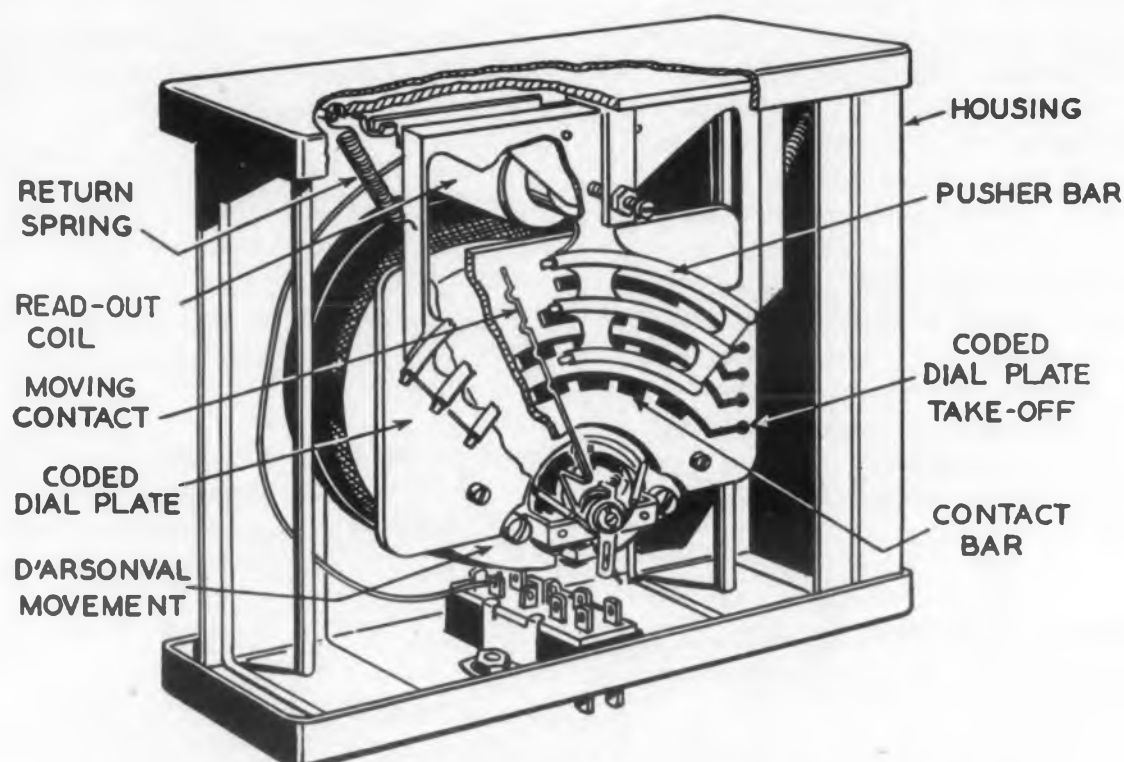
Fig. B. Cutaway view of LIAD showing how the indicator pointer is placed between the pusher bar and the coded printed-circuit dial plate.
